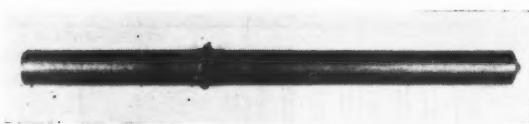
Flash butt welded twist drill blank, showing ridge of ejected material round weld periphery
